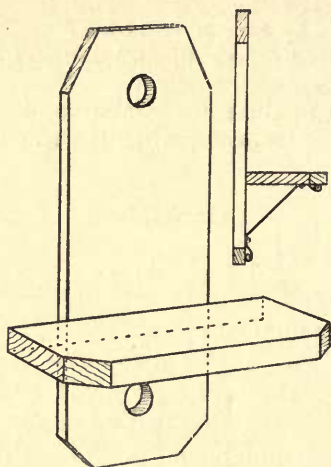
SMALL WALL-BRACKET (PERSPECTIVE VIEW)
